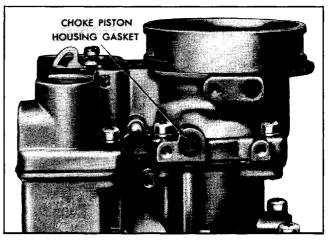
B-31 Choke Piston Housing Gasket Installed—Carter
